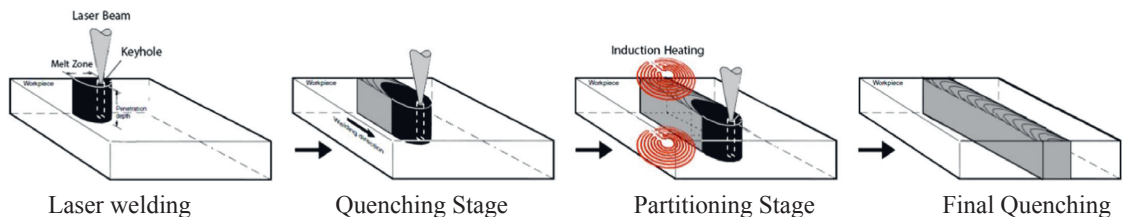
Schematic of the keyhole fiber laser welding process with Q & P post weld heat treatment.
